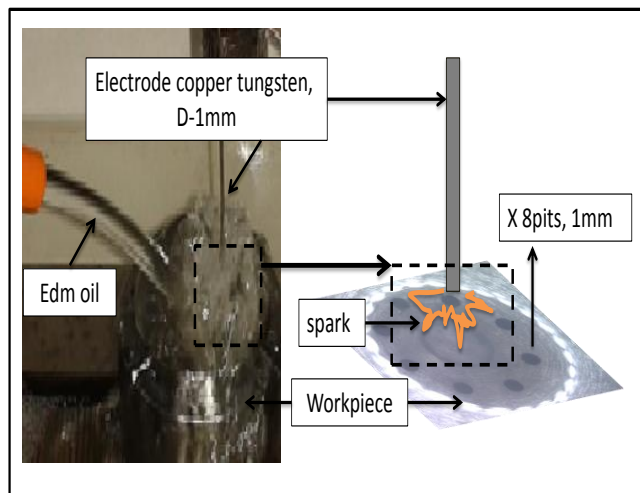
Experiment set up for machining pit on the acetabular (tool steel SKD 11)
